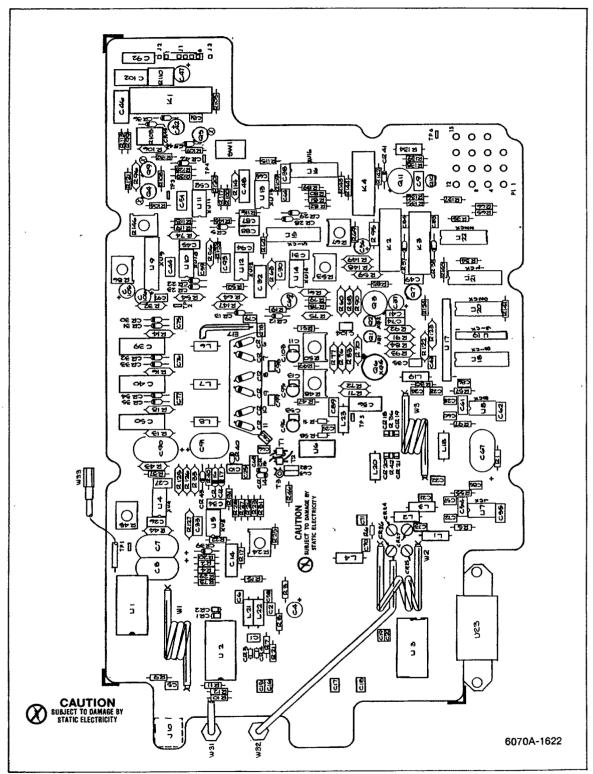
A3A3 Delay Discriminator PCB Assembly
